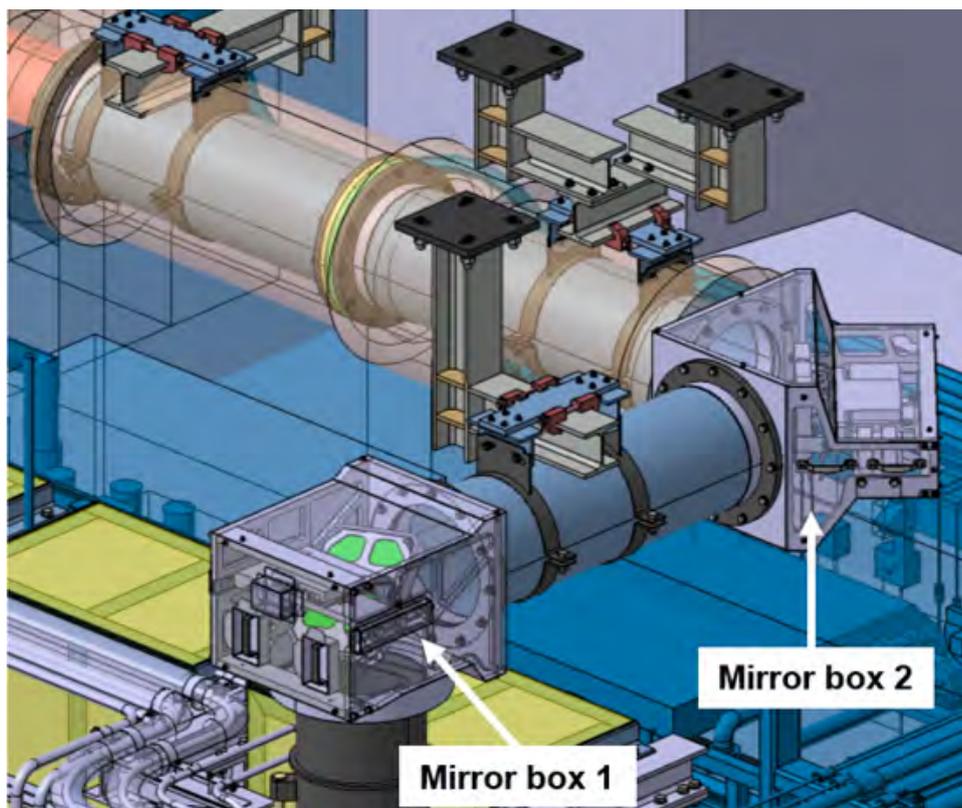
Example of Ex Vessel Optical relay unit (Rough Dimensions Mirror box 1 457 by 457 by 557 mm and Mirror box 2 449 by 698 by 688 mm)
